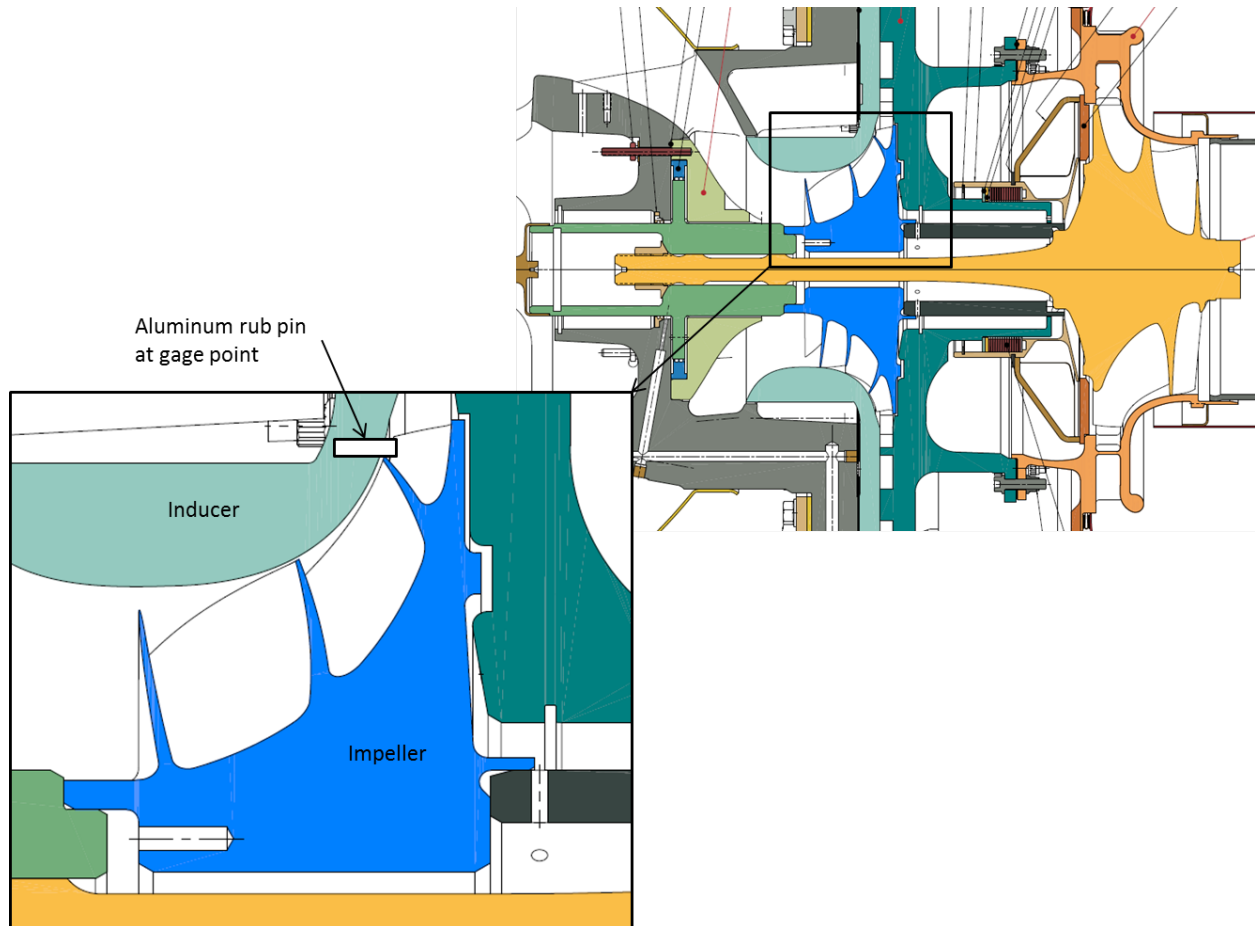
Cross-Section of C250 Rotor Group and Impeller/Inducer Detail
